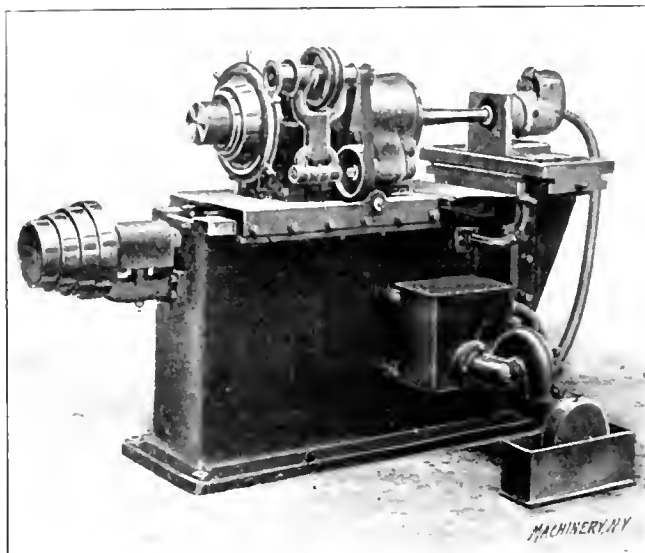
Rear View of Small Size Internal Grinding Machine, showing Dust Exhausting Arrangement.
